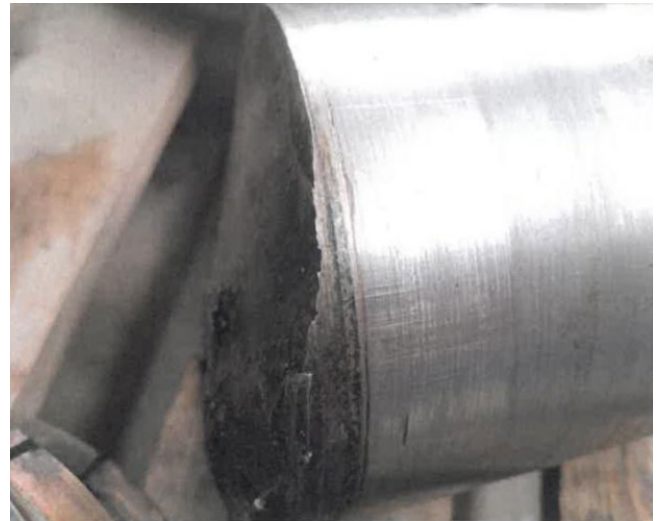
The fatigue fracture area of the axle journal with visible undercutting [5]
